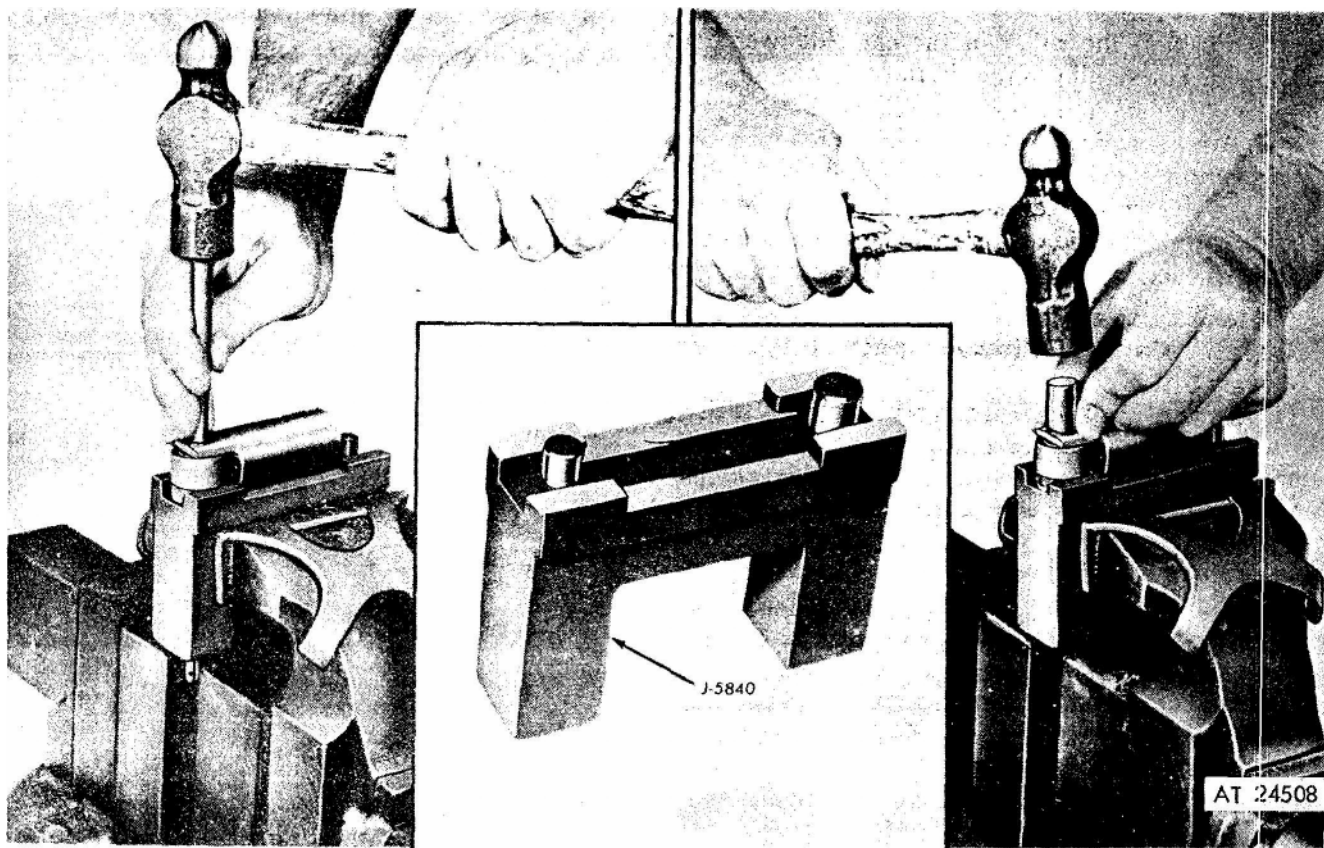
Removing or installing cam follower roller and pin with cam follower holding fixture tool J .5840.
